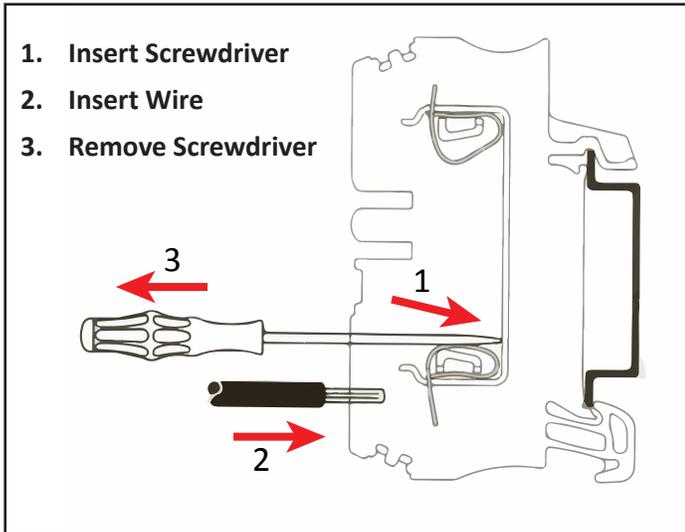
Spring-Clamp release using 2.5mm screwdriver
